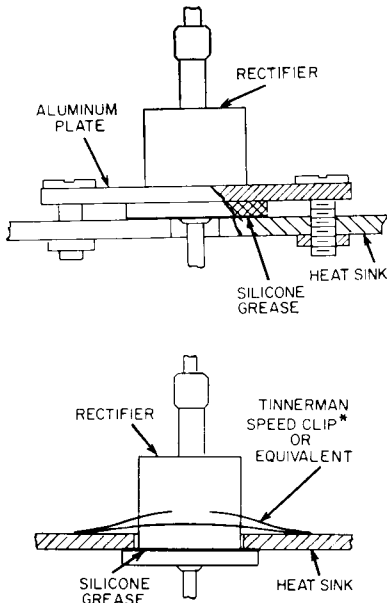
Methods of attaching the flange-case, axial-lead DO-1 package to a heat sink.
